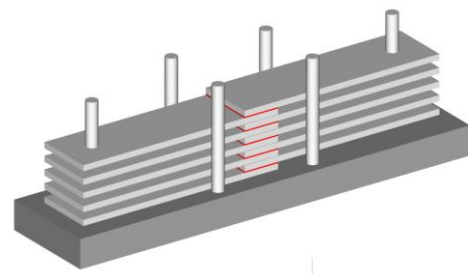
The tool in which the specimens were placed in order to obtain a given weld length
